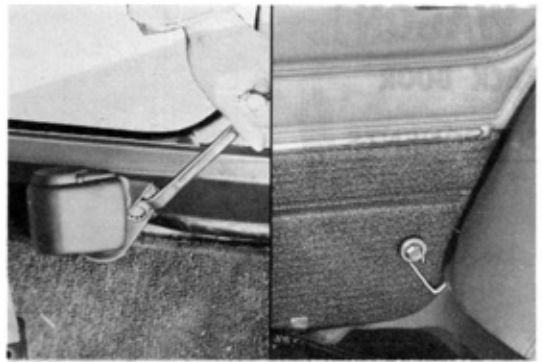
Removing Seat Belt Retractor and Seat Back
